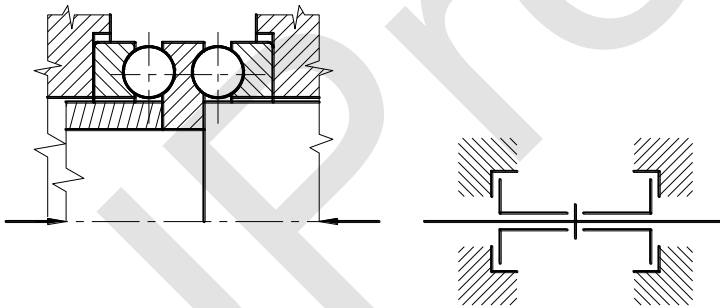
Bearing retaining of a double row thrust ball bearing
